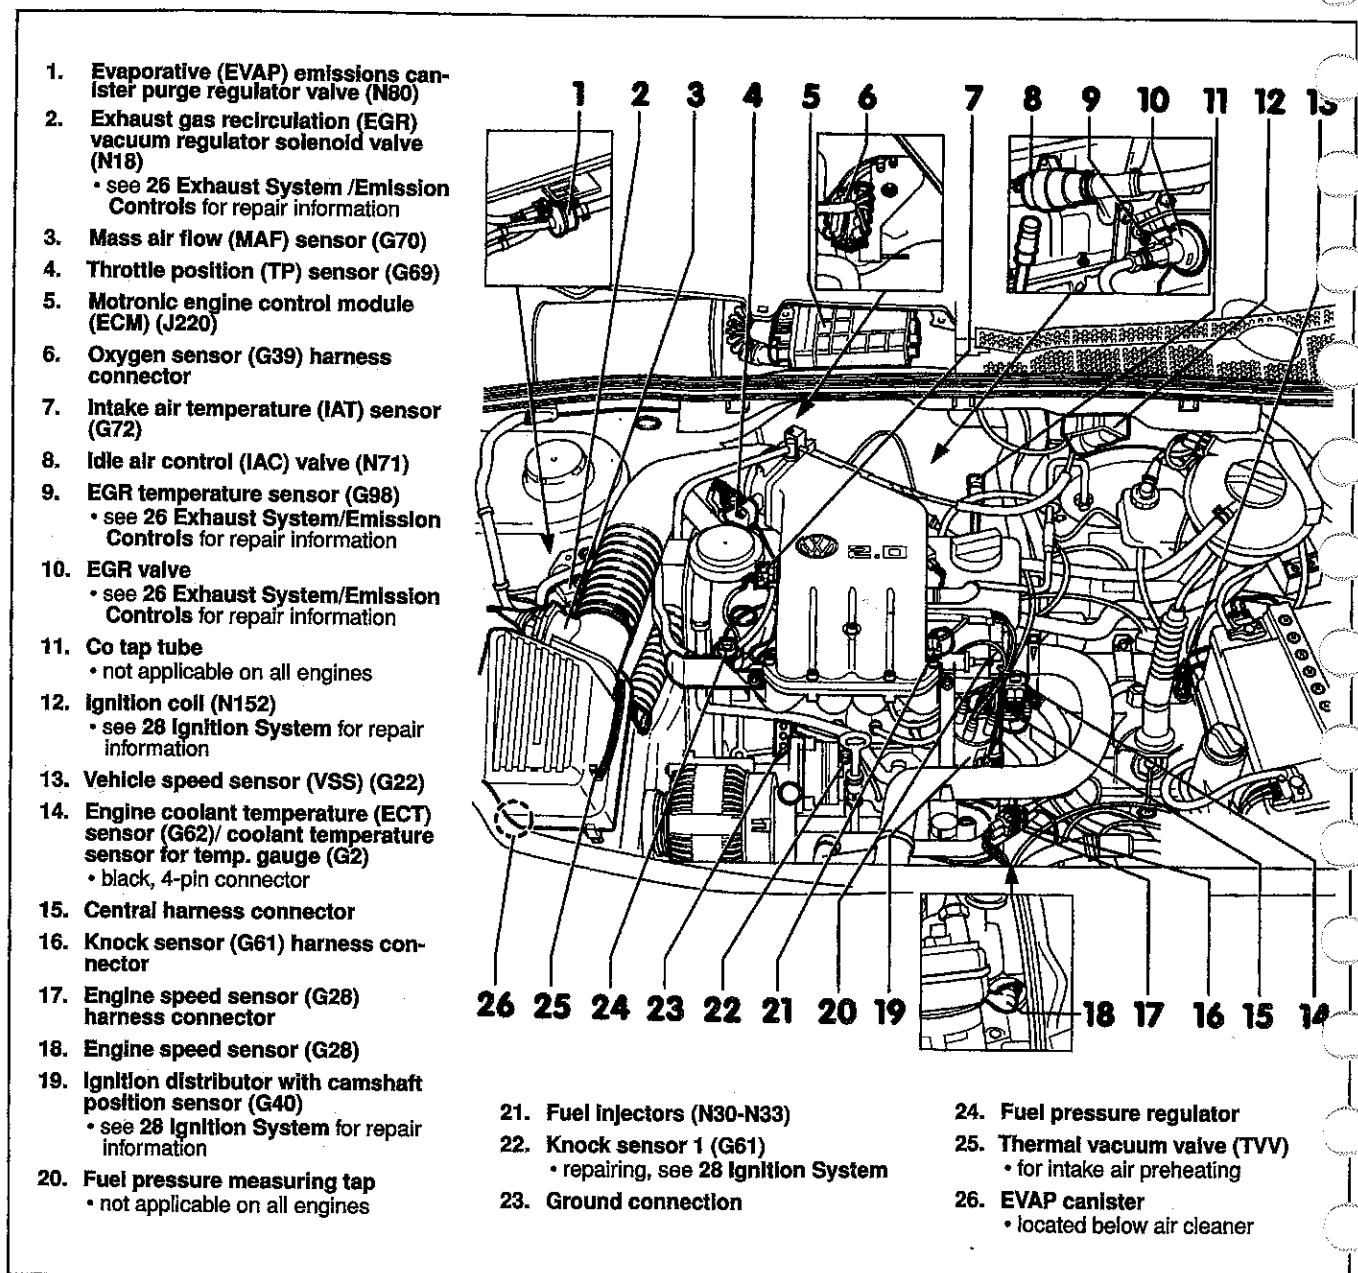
Motronic component location on 1993-1995 ABA (4-cylinder) engine.
